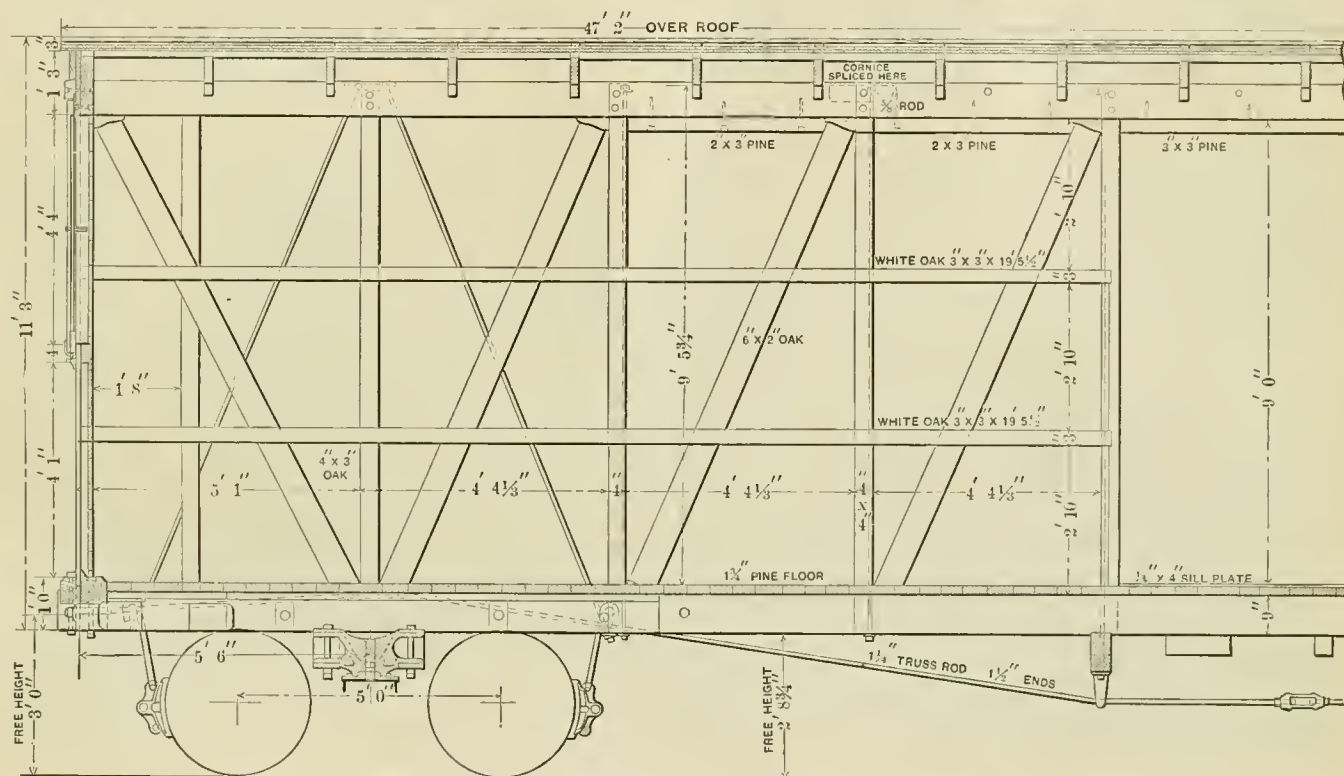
Framing of Forty-six Foot Furniture Car.—Chicago, Milwaukee & St. Paul Railway.
